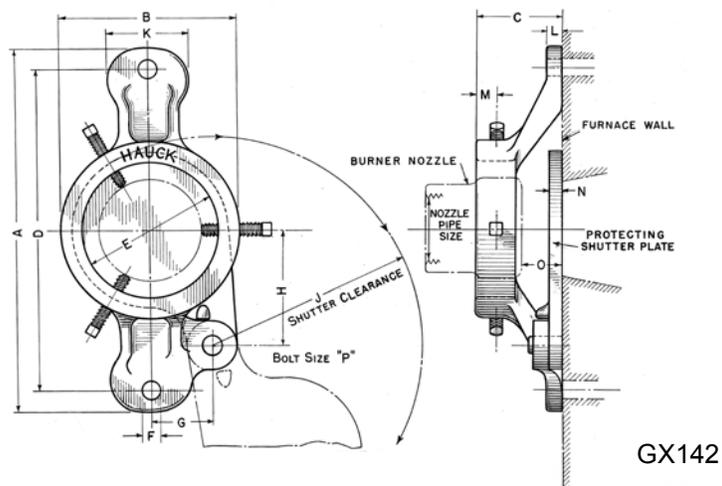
Mounting Bracket BMB 2253A – BMB 2255A
